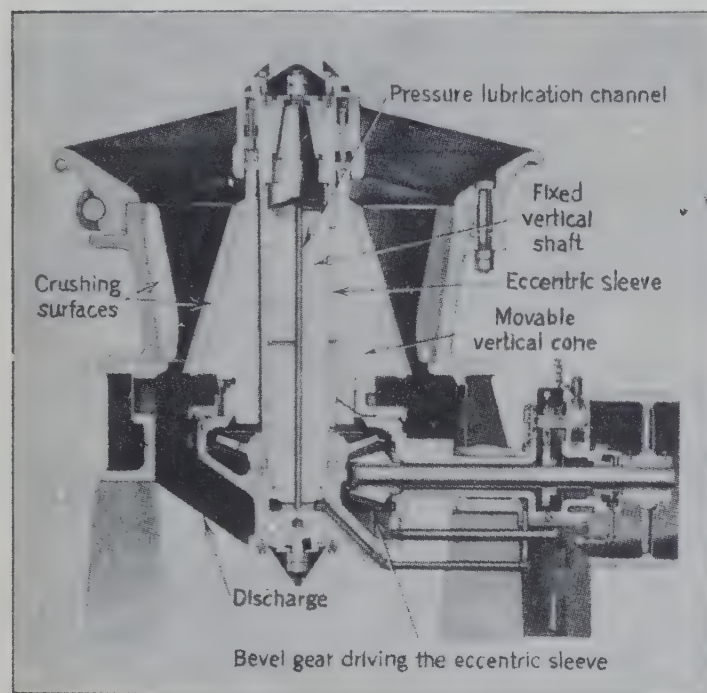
Sectional drawing of Telsmith parallel pinch crusher. (Smith Engineering Works.)
